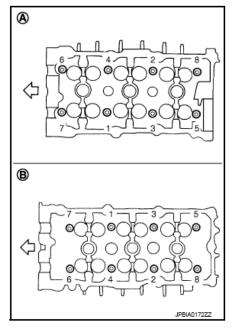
Cylinder Head Bolts Tightening Sequence (Bank 1 And 2) Courtesy of NISSAN MOTOR CO., U.S.A.
